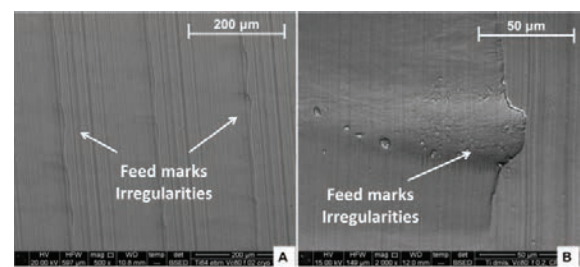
Examples of surface defects in cryogenic cooling at different magnification: a) 500X, b) 100X.
